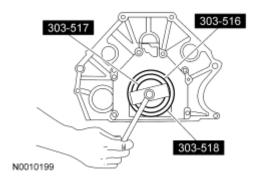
Using Special Tools To Install New Crankshaft Rear Seal Courtesy of FORD MOTOR CO.
